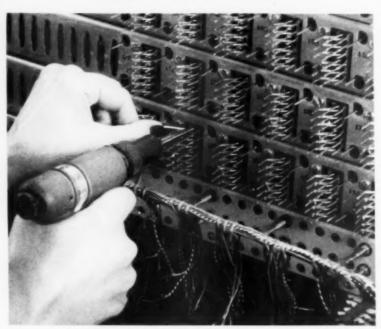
Air-Powered Wrapping Tool Here Is in Use Making Solderless Connections of Wires to Terminal Board for Telephone Central Office. Note the close quarters into which the tool spindle must fit
